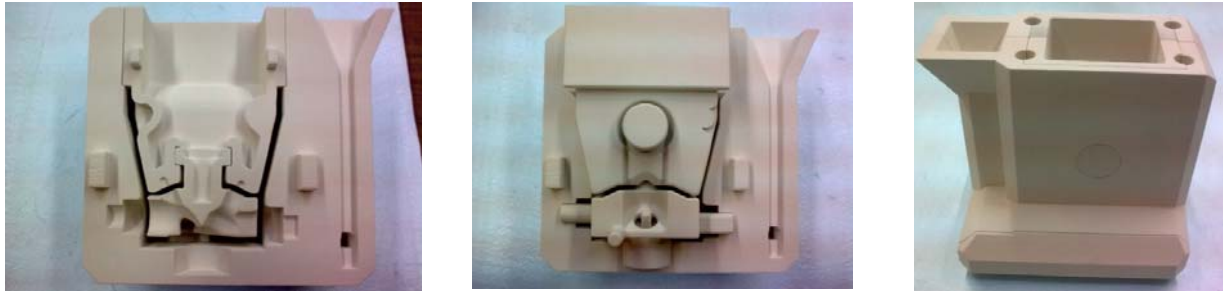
Rapid prototyped mould showing the complexity of the assembly needed to produce the part.
